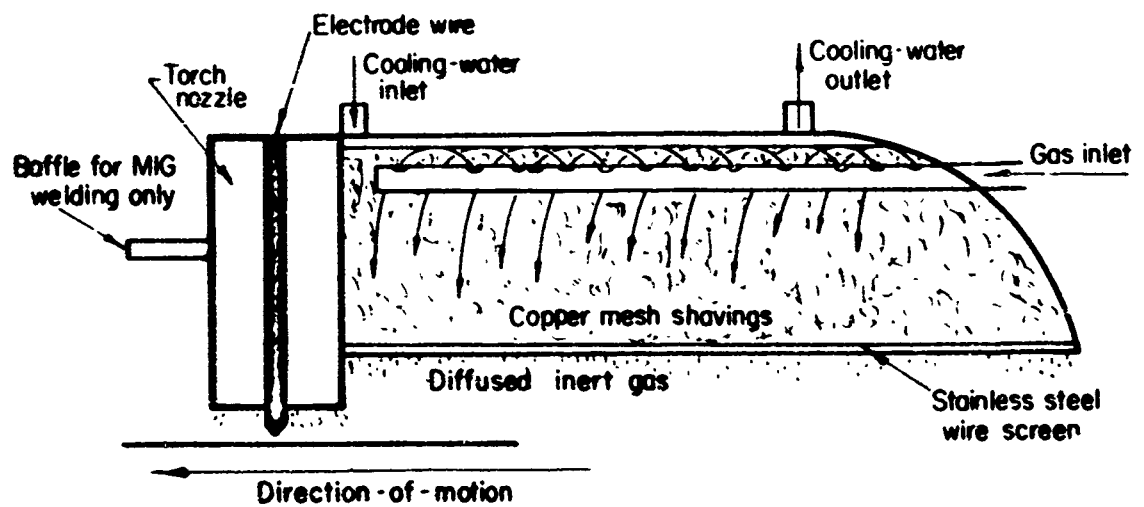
TIG-MIG TORCH-TRAILING-SHIELD ASSEMBLY WITH LEADING SHIELD BAFFLE FOR WELDING TITANIUM ALLOYS (REF. 8)
